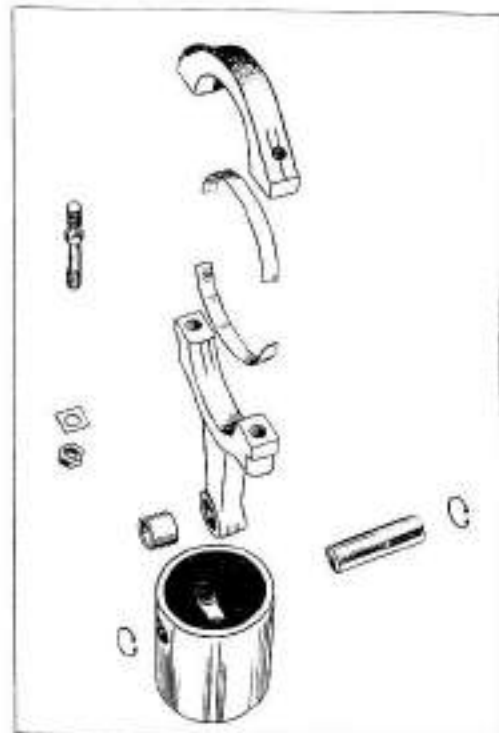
EXPLODED VIEW OF BALANCING PISTON AND CONN-ROD
